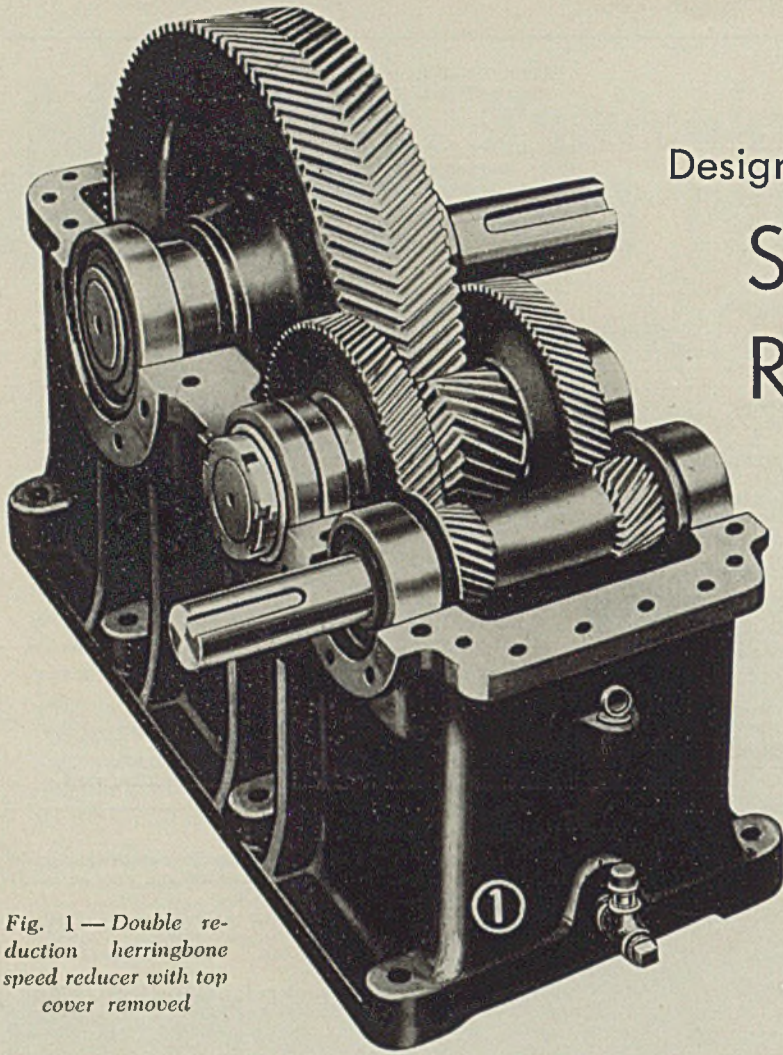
Double reduction herringbone speed reducer with top cover removed
